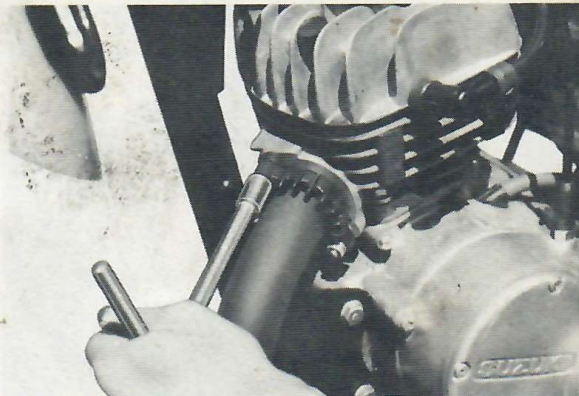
Unscrewing exhaust fitting nuts
